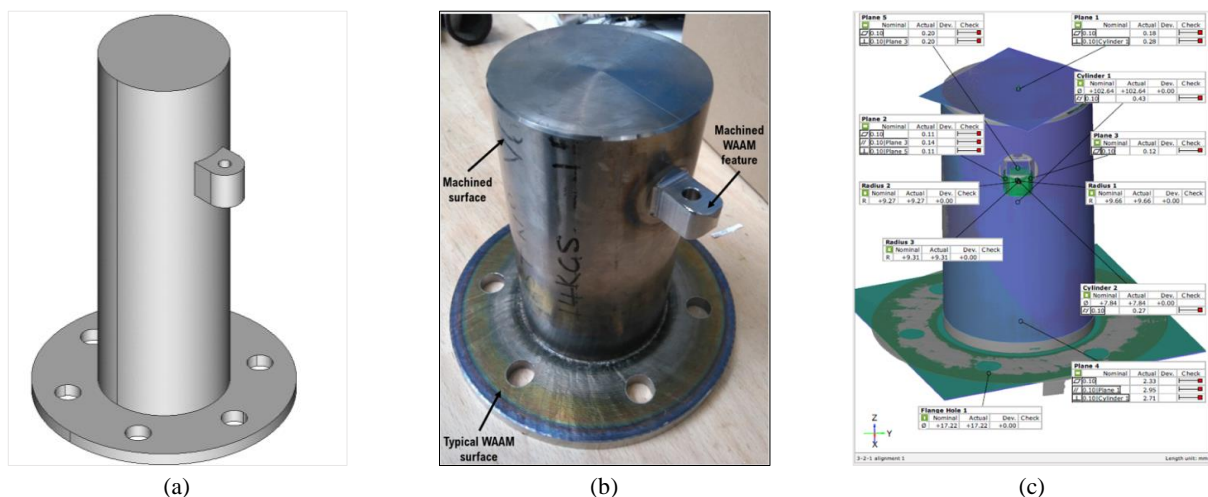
(a) CAD model for fabricating (b) hybrid-SMD component to support (c) 3D inspection analysis.
